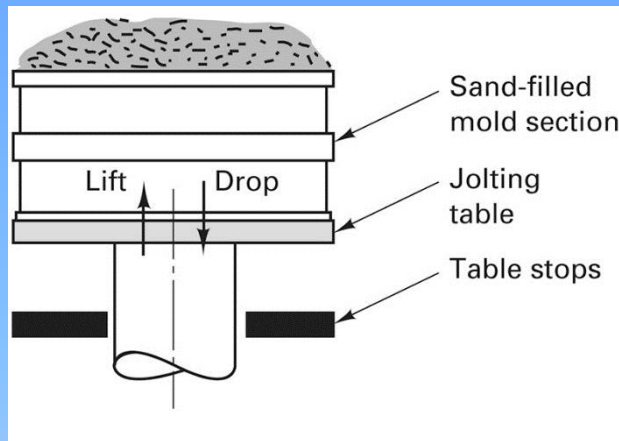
(Above) Jolting a mold section. (Note: The pattern is on the bottom, where the greatest packing is expected.)
